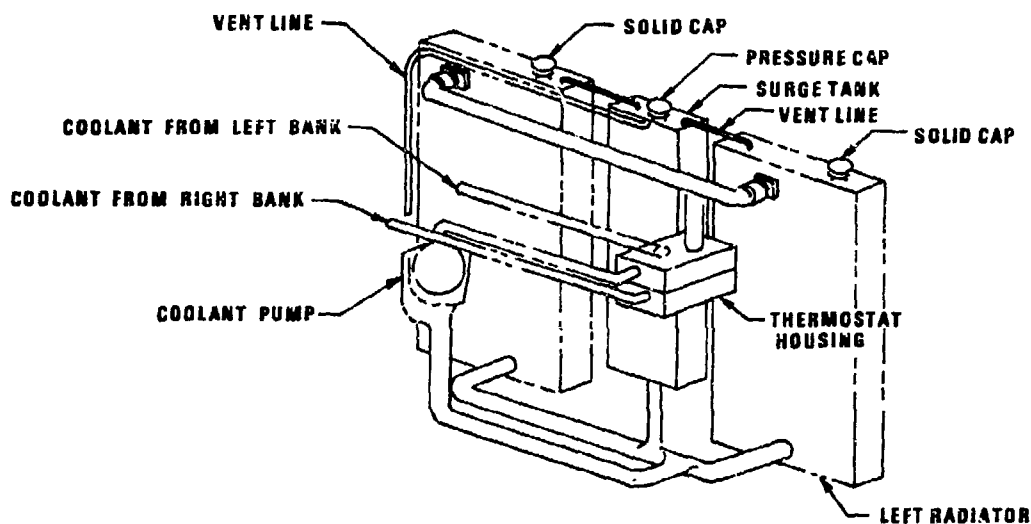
M107 Surge Tank Installation Schematic Diagram (USATACOM)
